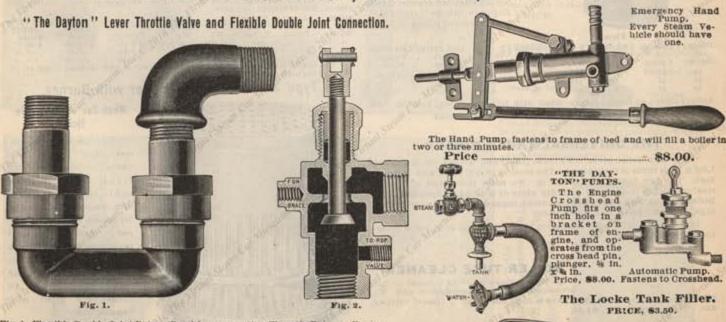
Flexible Double Joint Return Bend for connecting Throttle Valve to Engine. Brass, & in., \$5.00. Brass, & in., \$6.50.
